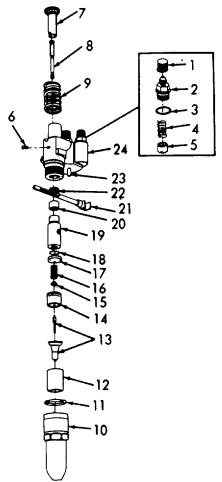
Fuel Injector, Disassembly/Reassembly. 3-88
